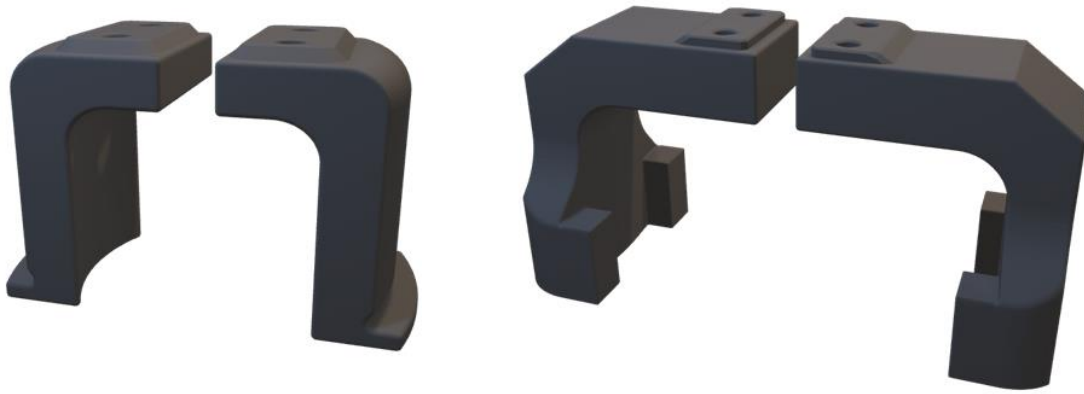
CAD models of the gripper fingers (left=flange, right=hydraulic motor)
